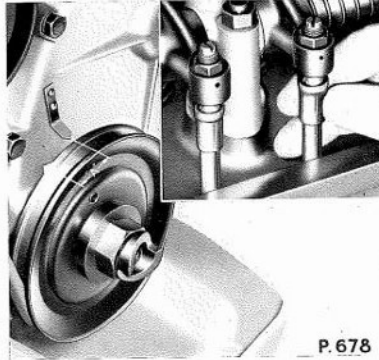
Checking the valve timing, using the pointers on the crankshaft pulley and timing cover (The inset shows number 1 cylinder inlet valve push rod rotated by hand, a marked tightness should be apparent as the push rod is rotated when dimension "A" is obtained).
